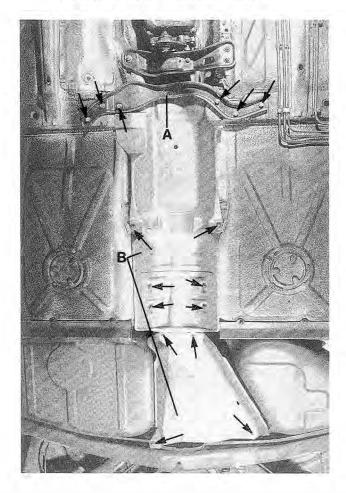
Rear reinforcement bar (A) and heat shields (B) to be removed after removing bolts (arrows).
